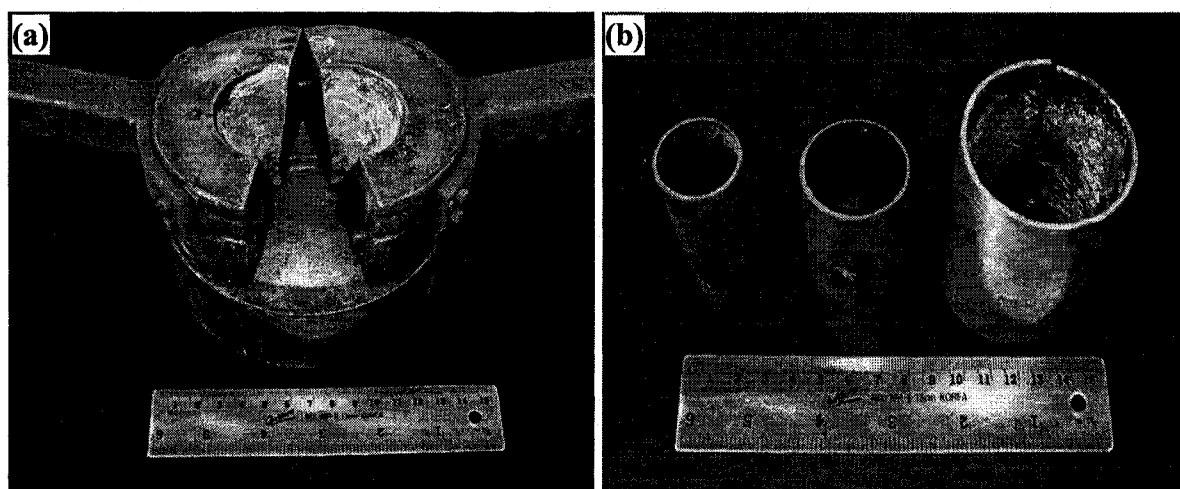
Permanent copper molds: (a) disk mold and (b) tube molds
